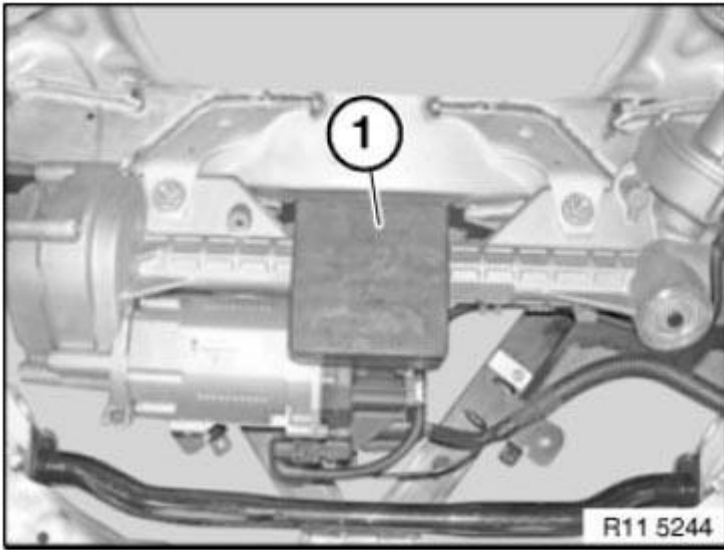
Connecting Special Tool 11 7 310 To Steering Box
